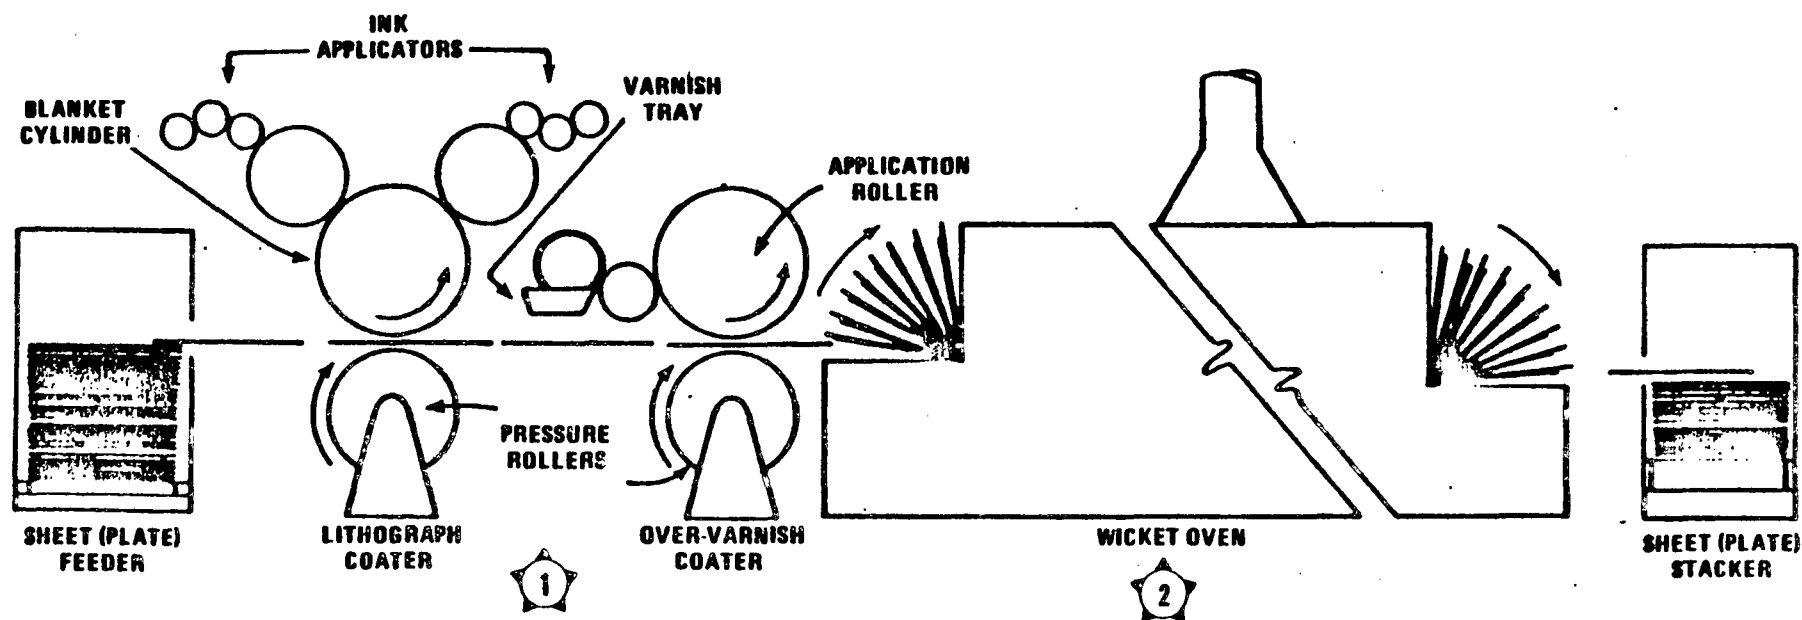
Three-Piece Can Sheet Printing Operation
